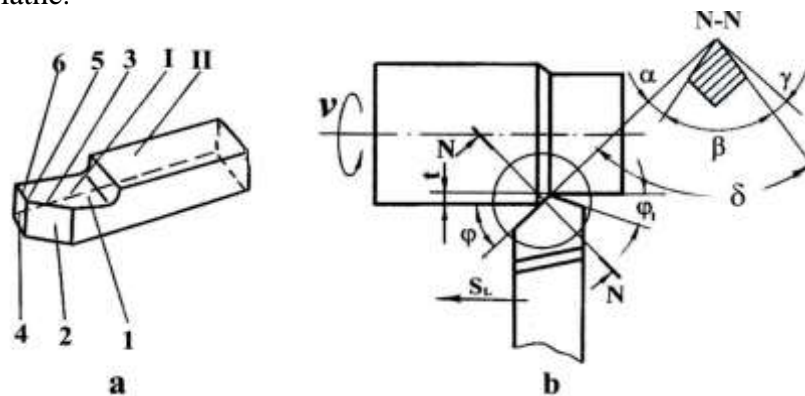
Elements, surfaces and cutting angles of a turning tool: I – working part; II – shank; 1 – top rake; 2 – main back rake; 3 – main edge; 4 – auxiliary back rake; 5 – point; 6 – auxiliary edge;  $\alpha$  - clearance angle;  $\beta$  - wedge angle;  $\gamma$  - top rake angle;  $\delta$  - cutting angle
